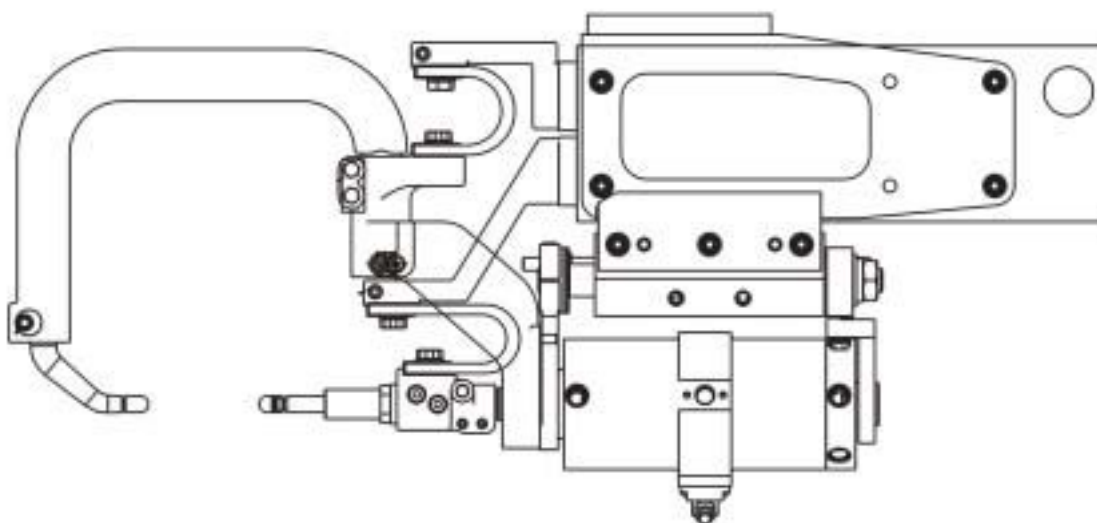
Robot Style, C-Type Gun w/Transformer
